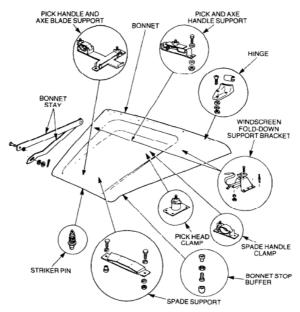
Bonnet and De-ditching Tool Holders - Exploded View
